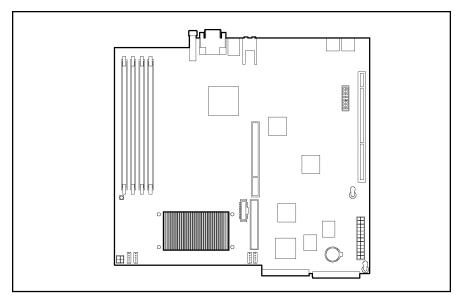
Locating the processor on the system board (center wall removed for clarity)
